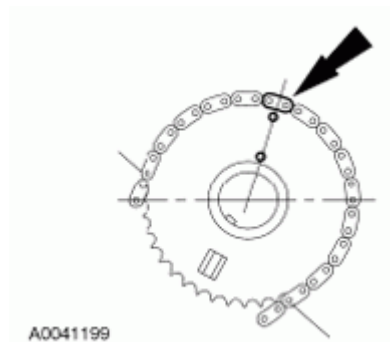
Locating Timing Marks On Camshaft Sprocket
